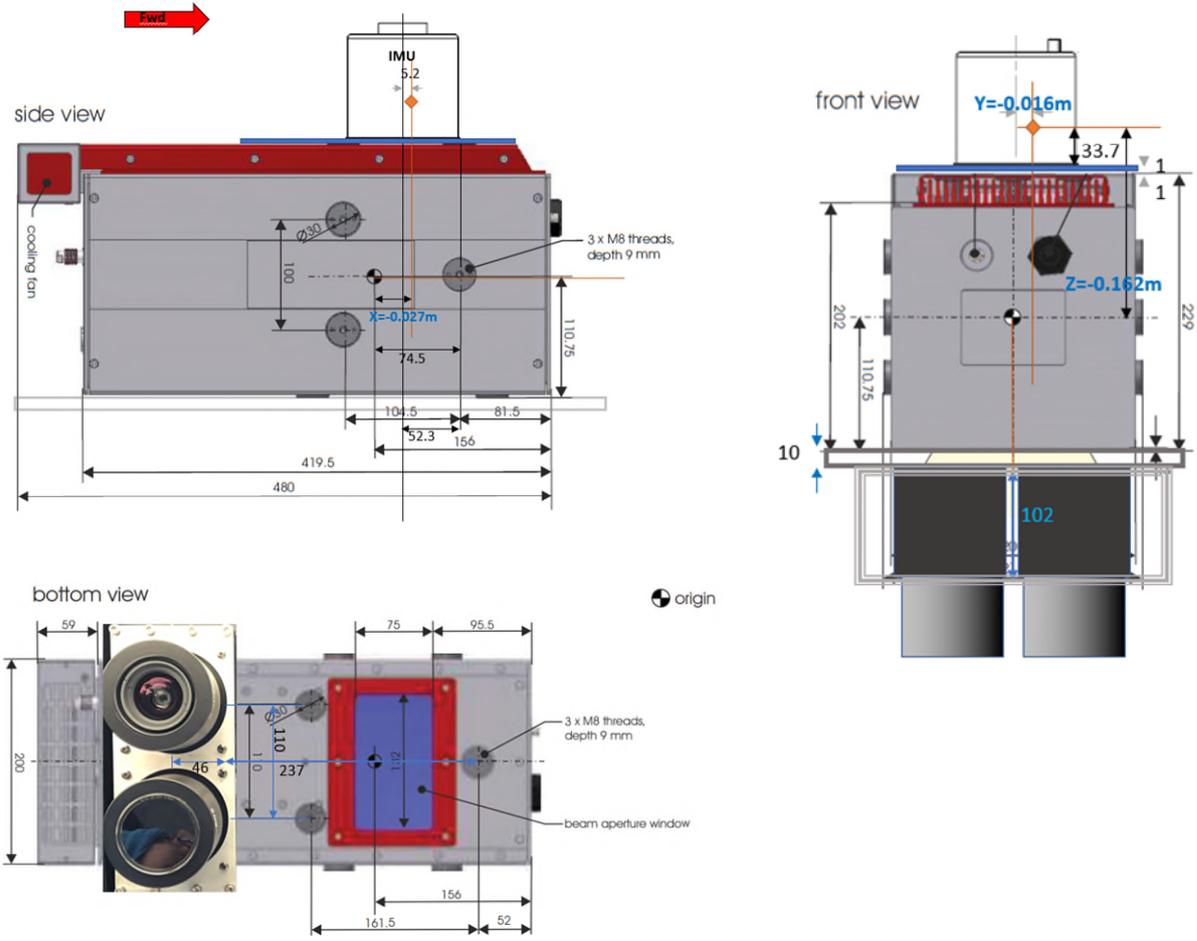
Q680i sensor with IMU and PhaseOne cameras (clockwise views: side; front, bottom) Red arrow points forward on the X-axis. Dimensions in millimetres.
